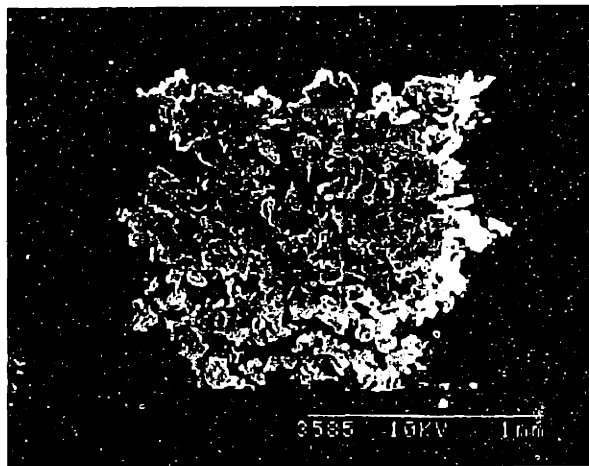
Cross sectional view of specimen device showing sintering defects
